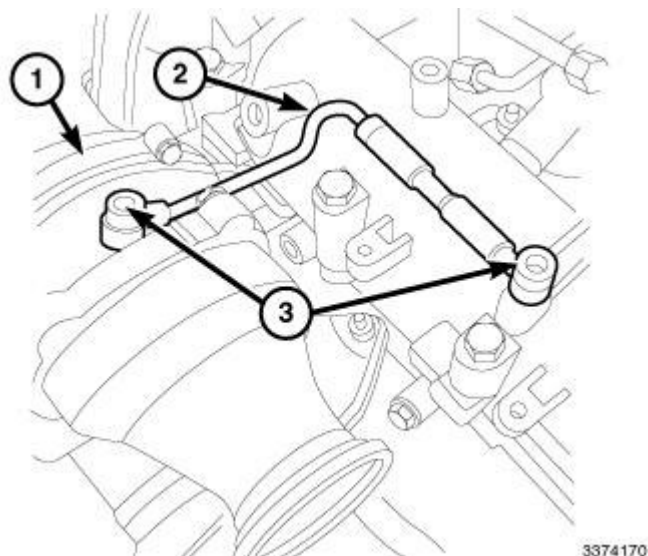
Turbocharger, Oil Feed Line & Banjo Bolts
